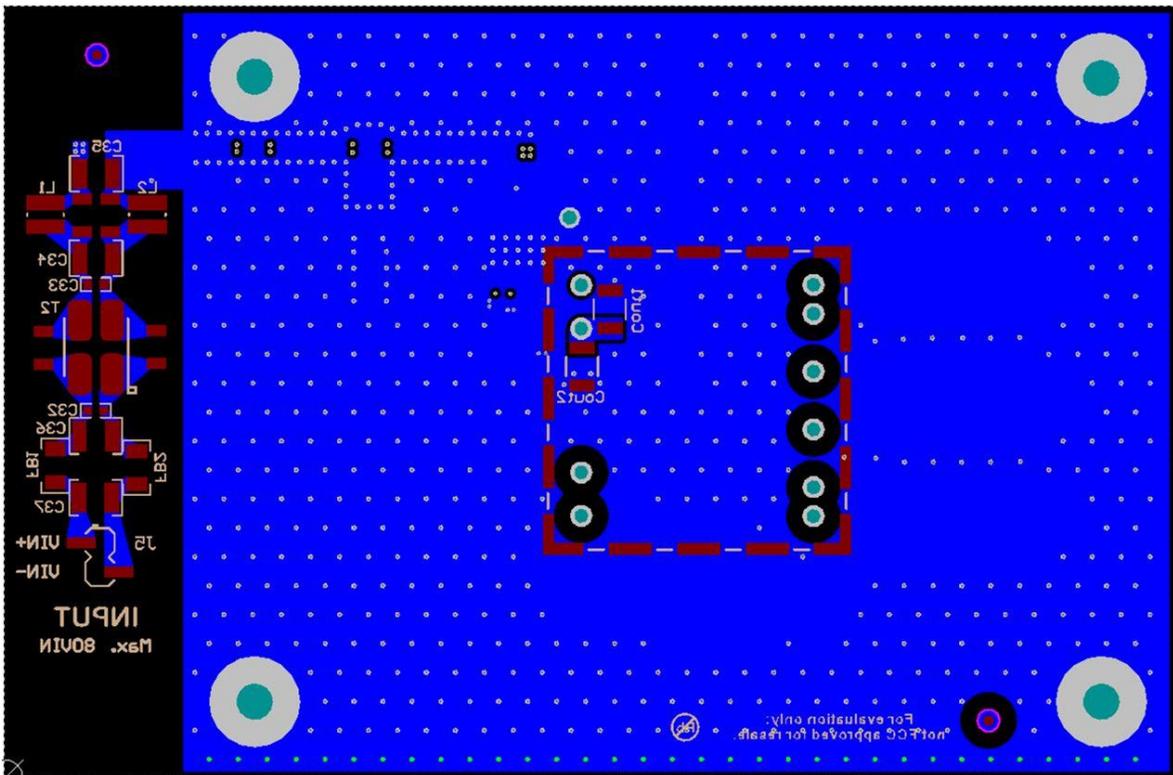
48-V Flyback IGBT Supply Design: Layout – Bottom Layer (dark blue)
